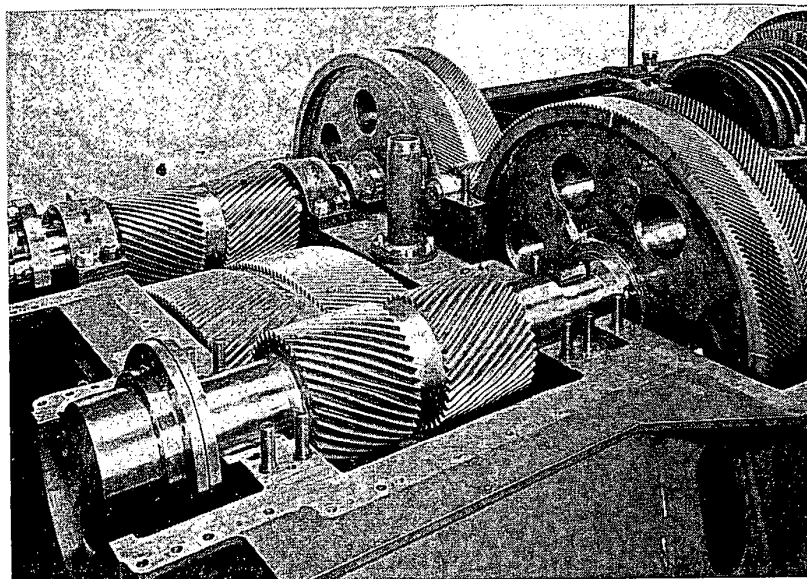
Partly disassembled DT-type gear unit for ship propulsion rated at 4,000 hp. (Courtesy of General Electric Co.)
